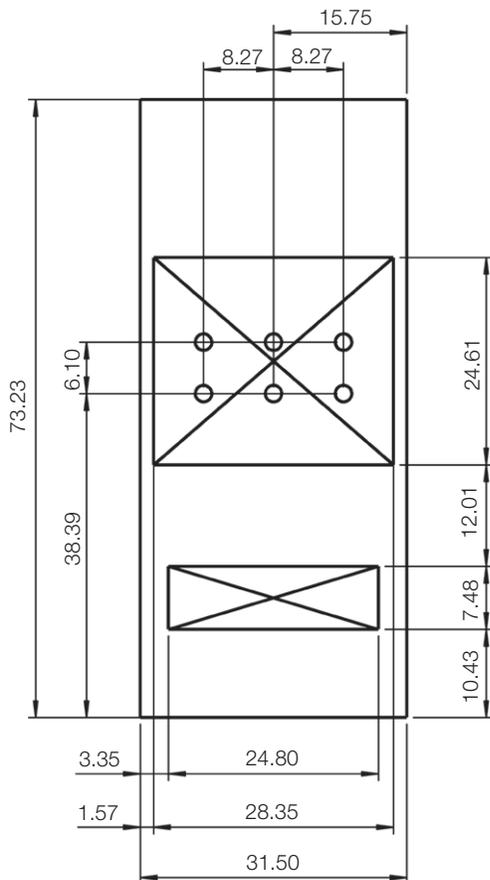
Panel with outer cone cable plug system, panel width 23.62 in, dimensions in inches
